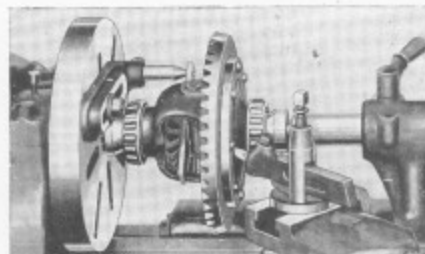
Cutting-off Rivet Heads to Remove Old Ring Gear from Differential.
